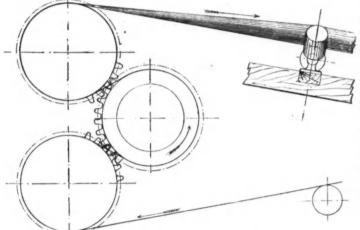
METHOD OF DRIVING LONG CONVEYORS FROM THE RECEIVING END
